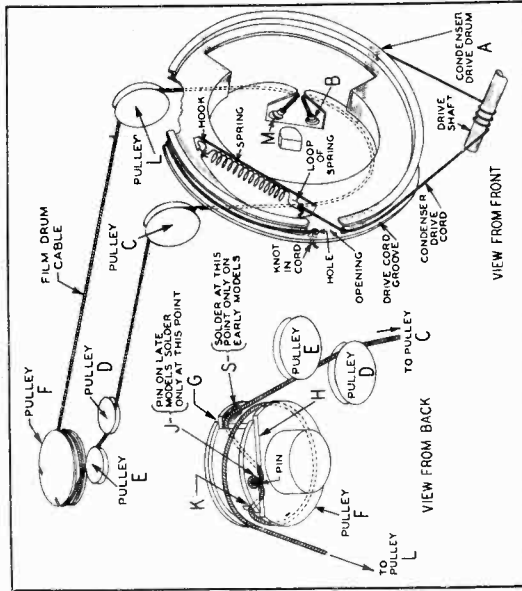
Replacing Film Drum Cable and Condenser Drive Cord
